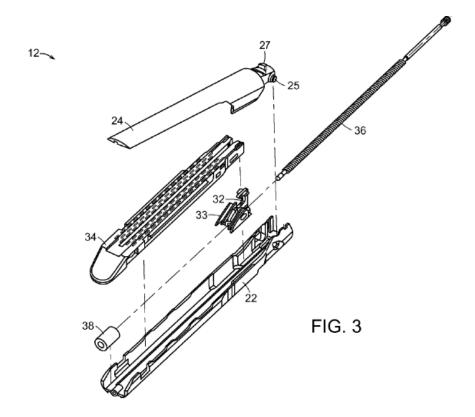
is an exploded view of end effector 12. *Id.* at 4:22. End effector 12 includes channel 22, anvil 24, cutting instrument 32, sled 33, staple cartridge 34 that is removably seated in channel 22, and helical screw shaft 36. *Id.* at 4:24–27. Cutting instrument 32 may be, for example, a knife. *Id.* at 4:28.
